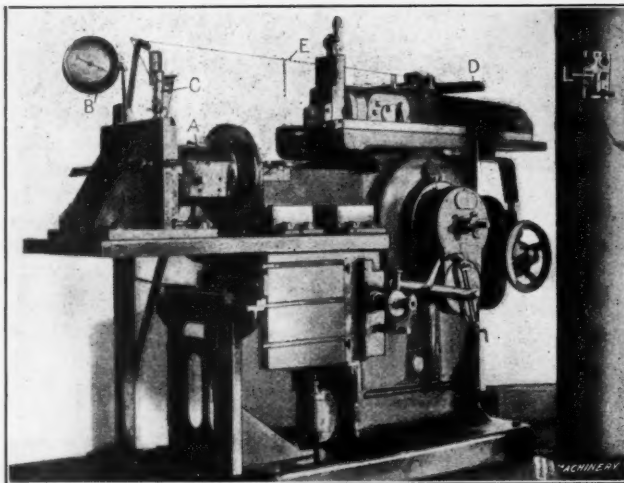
Stockbridge Shaper equipped for conducting an Efficiency Test
